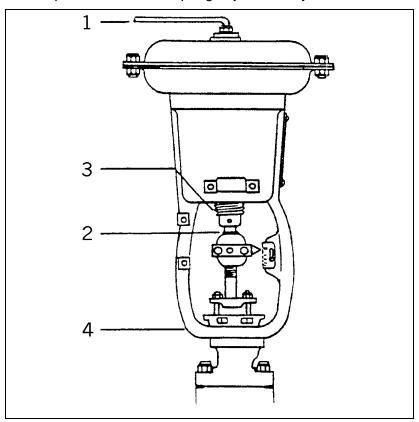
Spring Adjustment Air-to-Close (Direct Acting) Actuator
